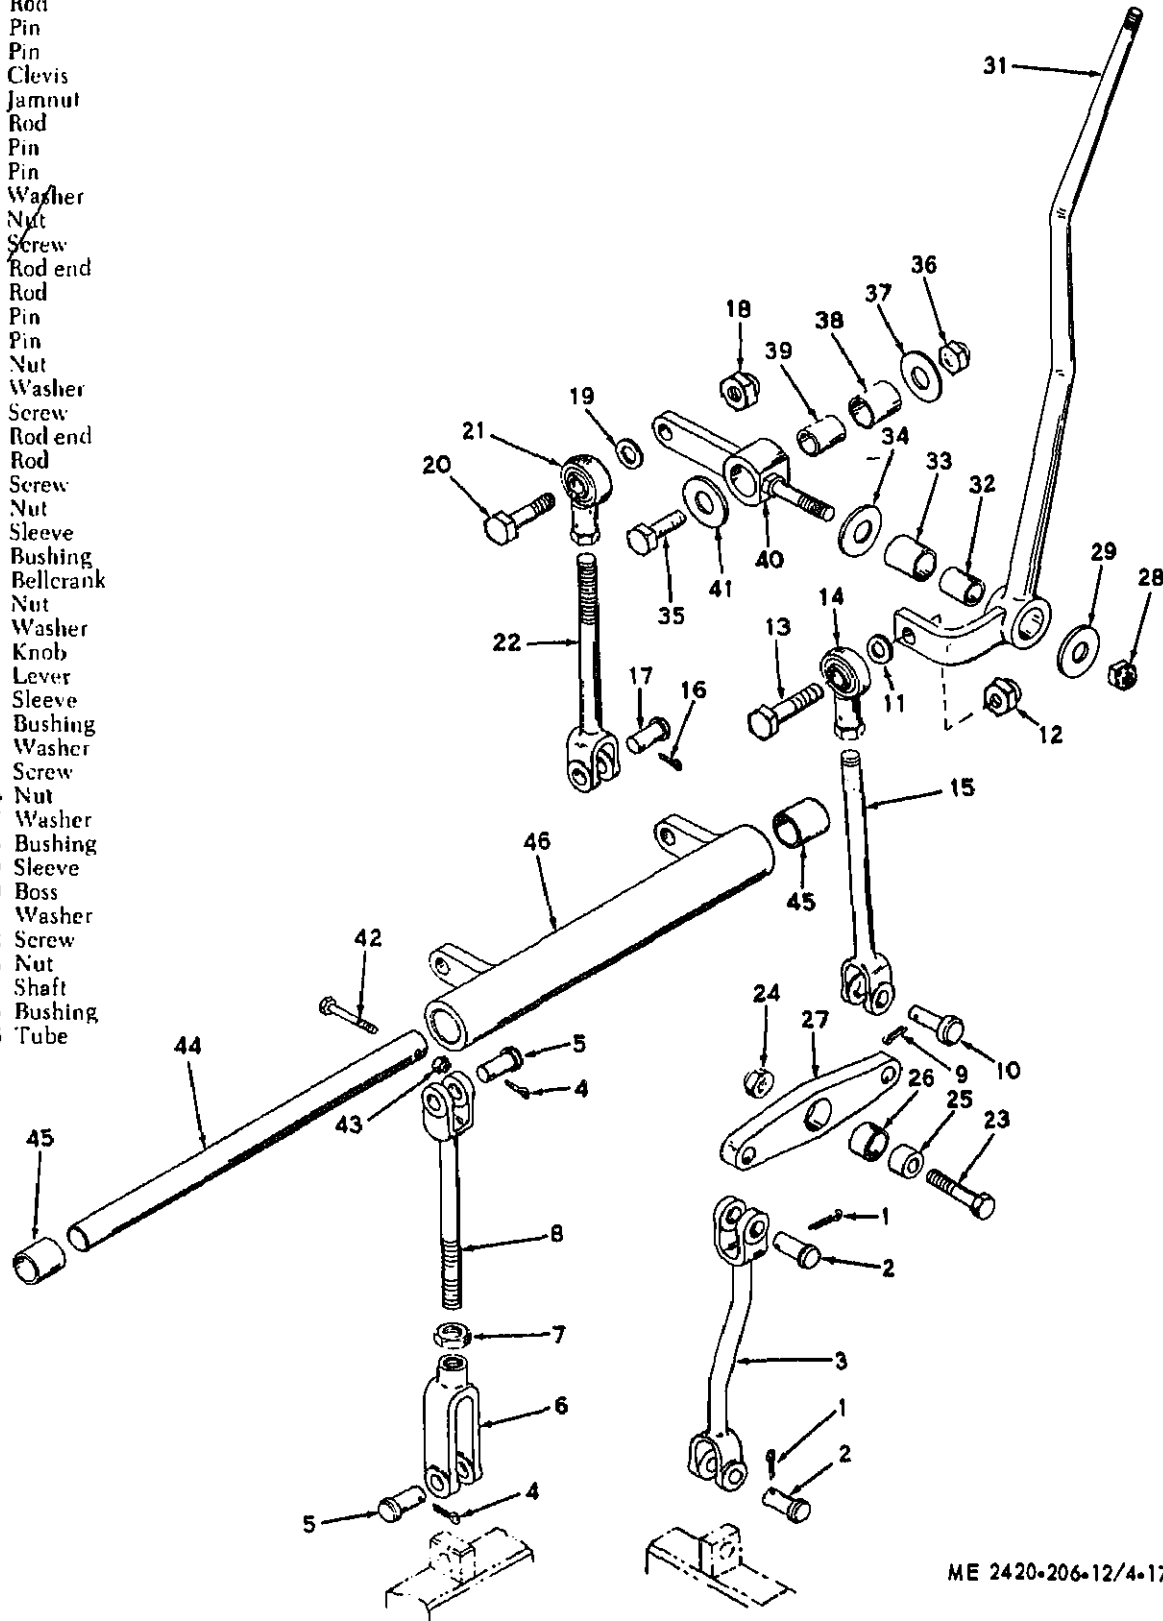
Bulldozer controller lever removal/disassembly: necessary
